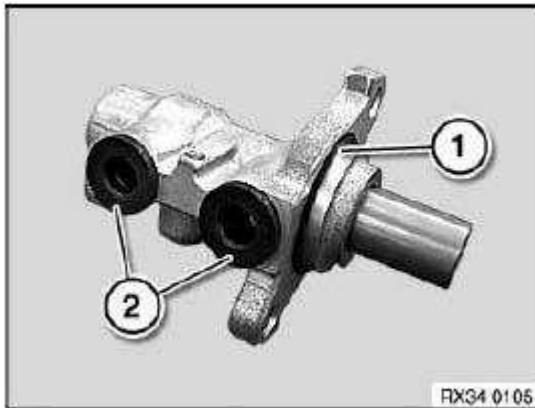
Identifying Rubber Plugs And Sealing Ring
